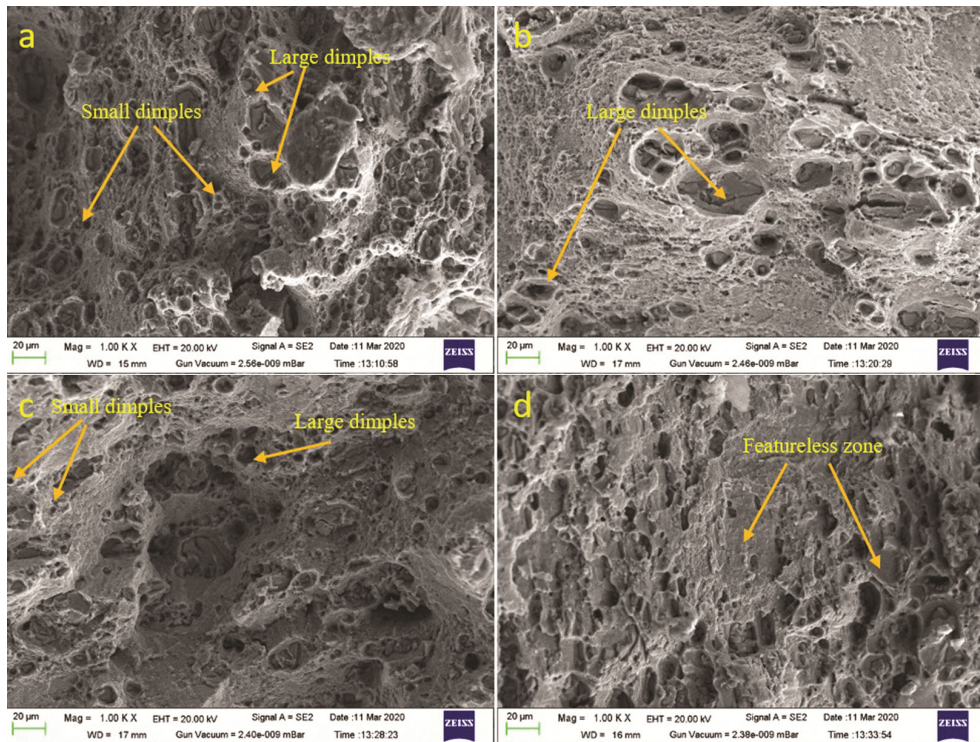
SEM images at a point on the fracture surface of welded joints (a) 20-7T6, (b) 2T6-7O, (c) 20-7O, and (d) 2T6-7T6.
